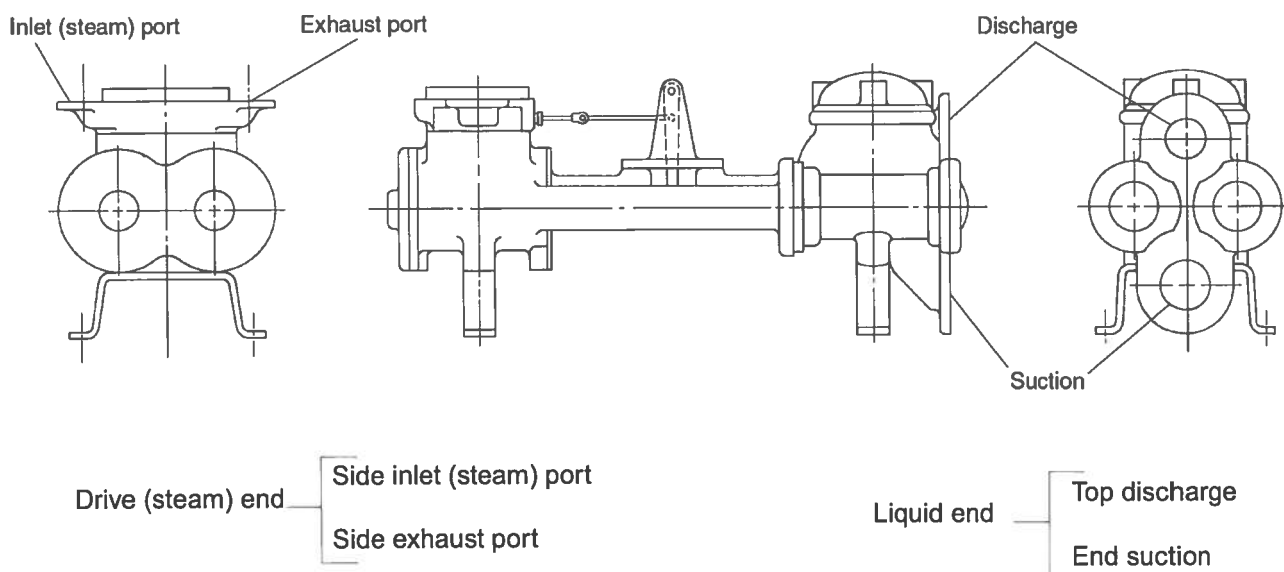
Horizontal duplex direct acting (steam) pump
